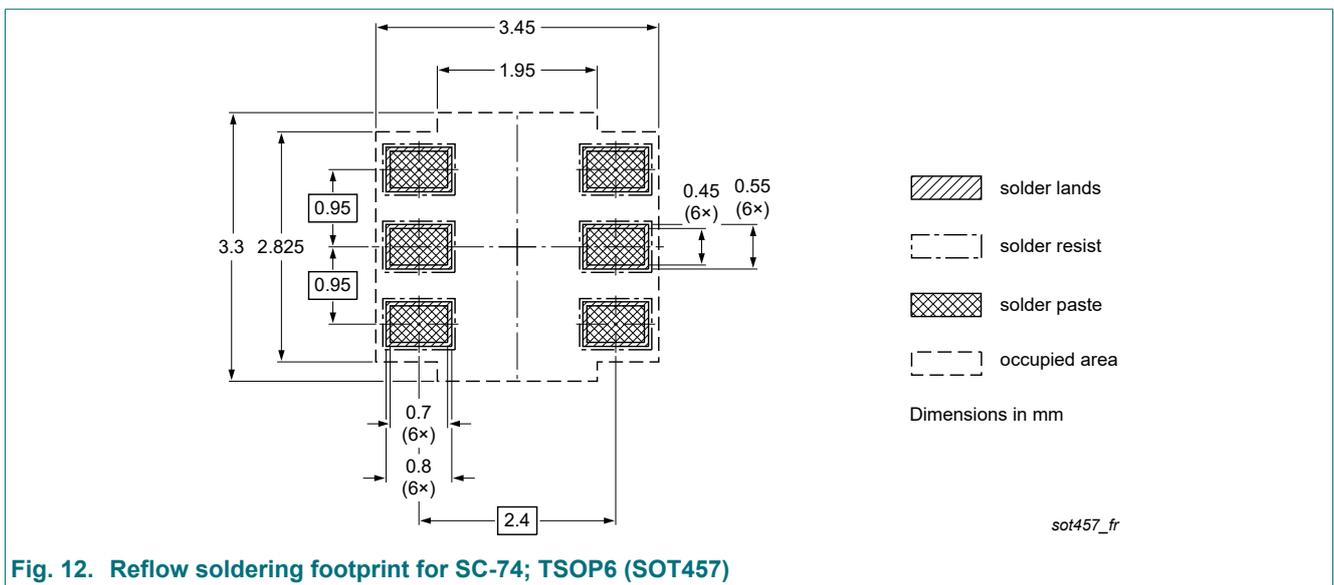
Reflow soldering footprint for SC-74; TSOP6 (SOT457)
